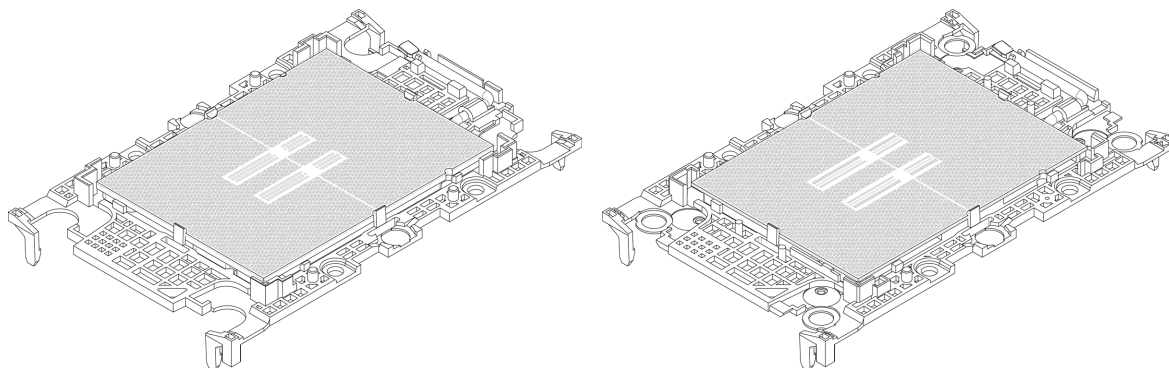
Carrier Assembly Completed (SP XCC E2A left, SP HCC/LCC E2B right)
